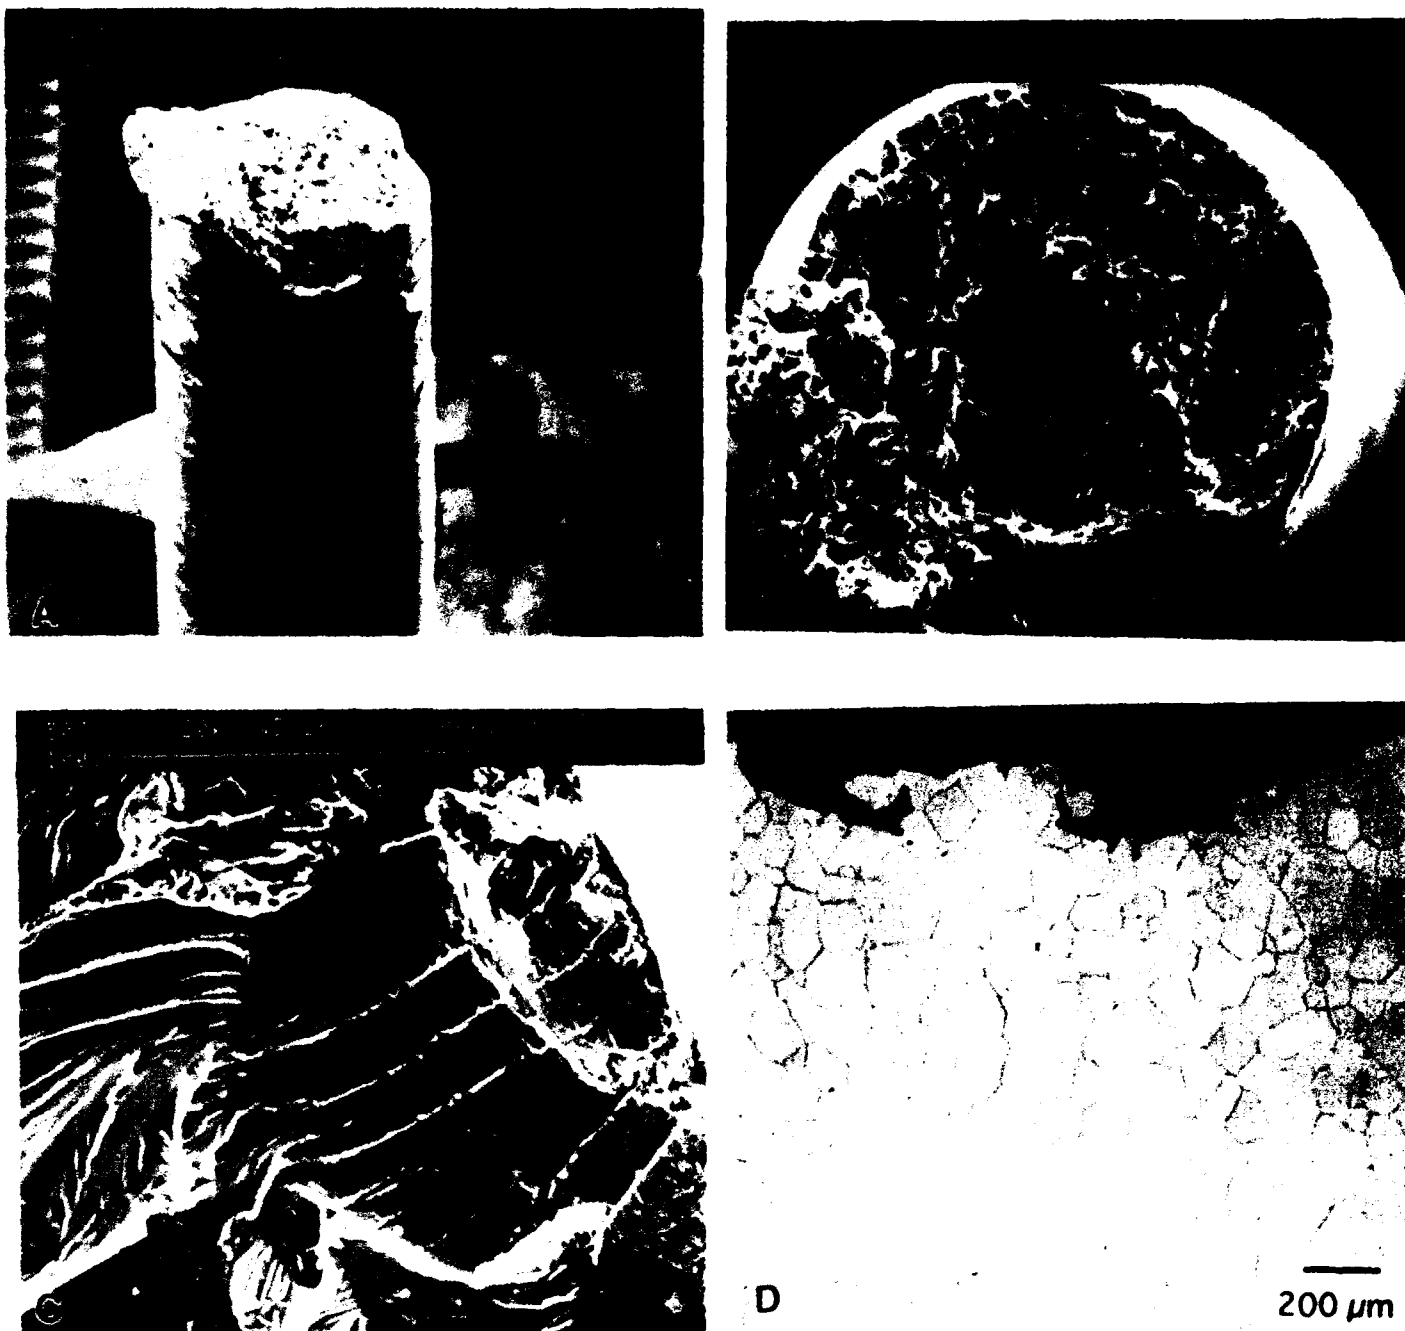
Micrographs taken from the 870°C tensile test specimen showing three magnifications of the fracture surface showing the presence of (a) surface cracks ( b ), cleavage initiation and intergranular fracture ( c ), and beachmarkings ( d ) and d) the microstructure of the specimen below the fracture surface.
